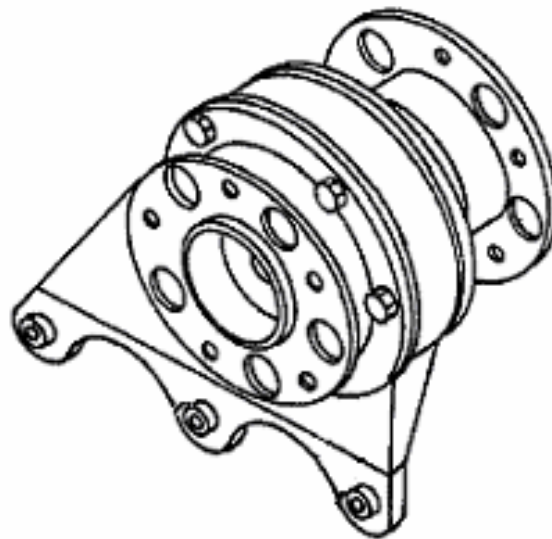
Aft Hanger Bearing Assembly (AH-64A/D)
